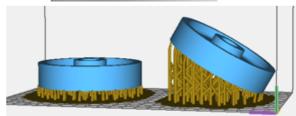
Blank gear oriented horizontal left, 30 grad right to study the printing dimension
